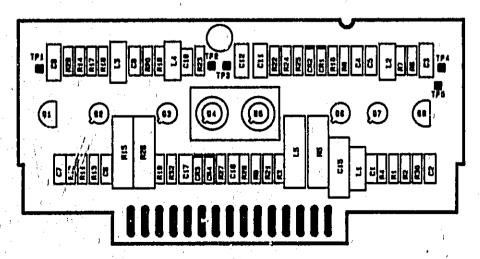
, A9 Mixer and Integrator Assembly Component Identification (CHANGE 6)
